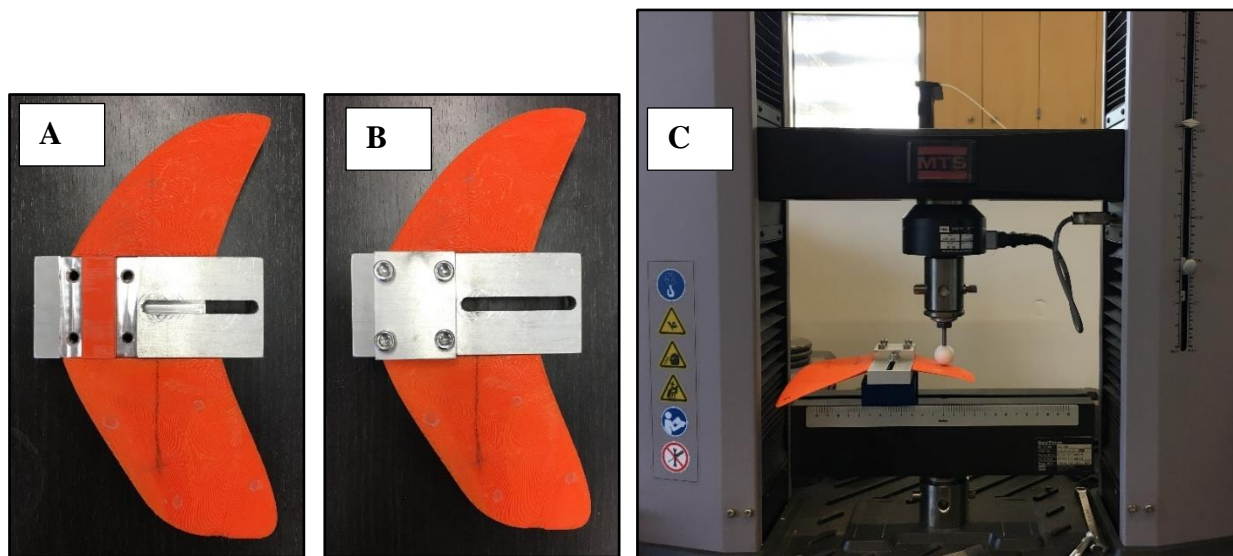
Two-piece blade fixture A) without top half and B) with top secured. The c-shaped lid is secured with four bolts that provide clamping pressure. A slot allows the fixture position to be adjusted within the MTS machine to precisely locate the applied load. A photograph C) of the blade fixture positioned in MTS machine. The white Delrin sphere is used to approximate a point load on the blade.
